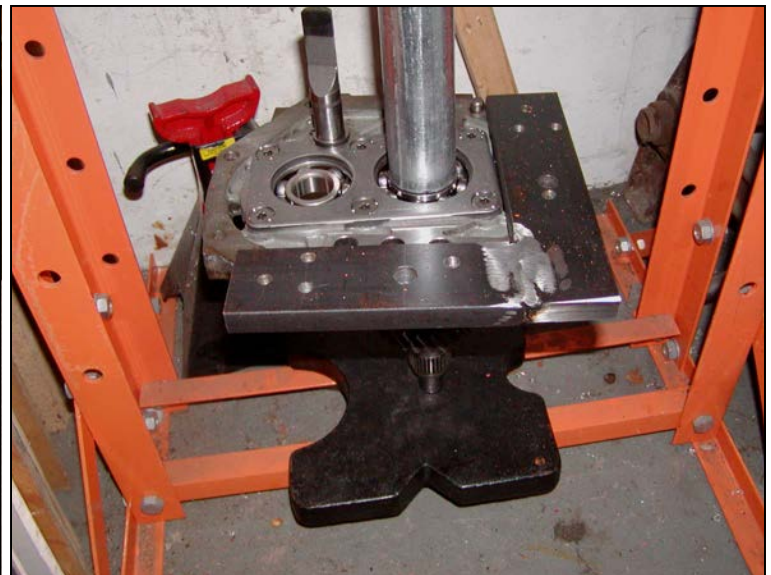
Showing the proper setup for installing the mainshaft into the adapter plate.
